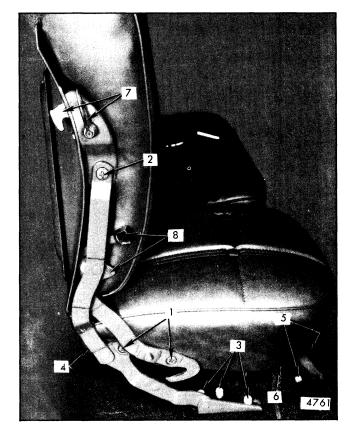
Folding Second 1/3 Seat Back Outer Linkage, Seat Back Lock and Linkage Lock - "B" Body Three-Seat Station Wagon
